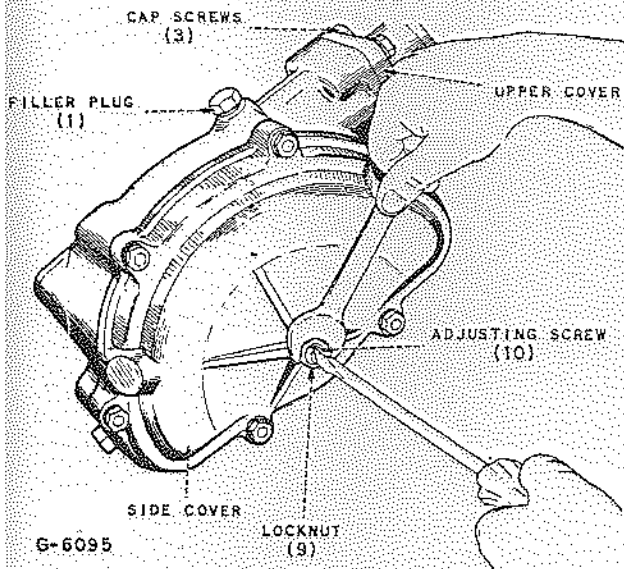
Illustrates location of Adjusting Screw and Locknut
